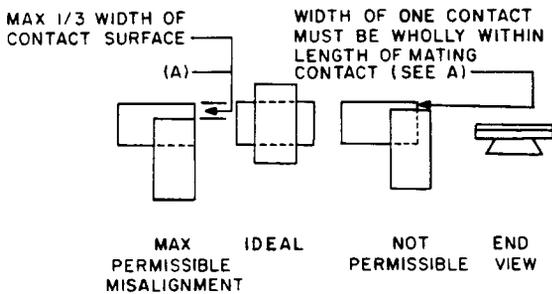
Alignment of Heavy Bar-Type Contacts — Plan View of Contact Surfaces
